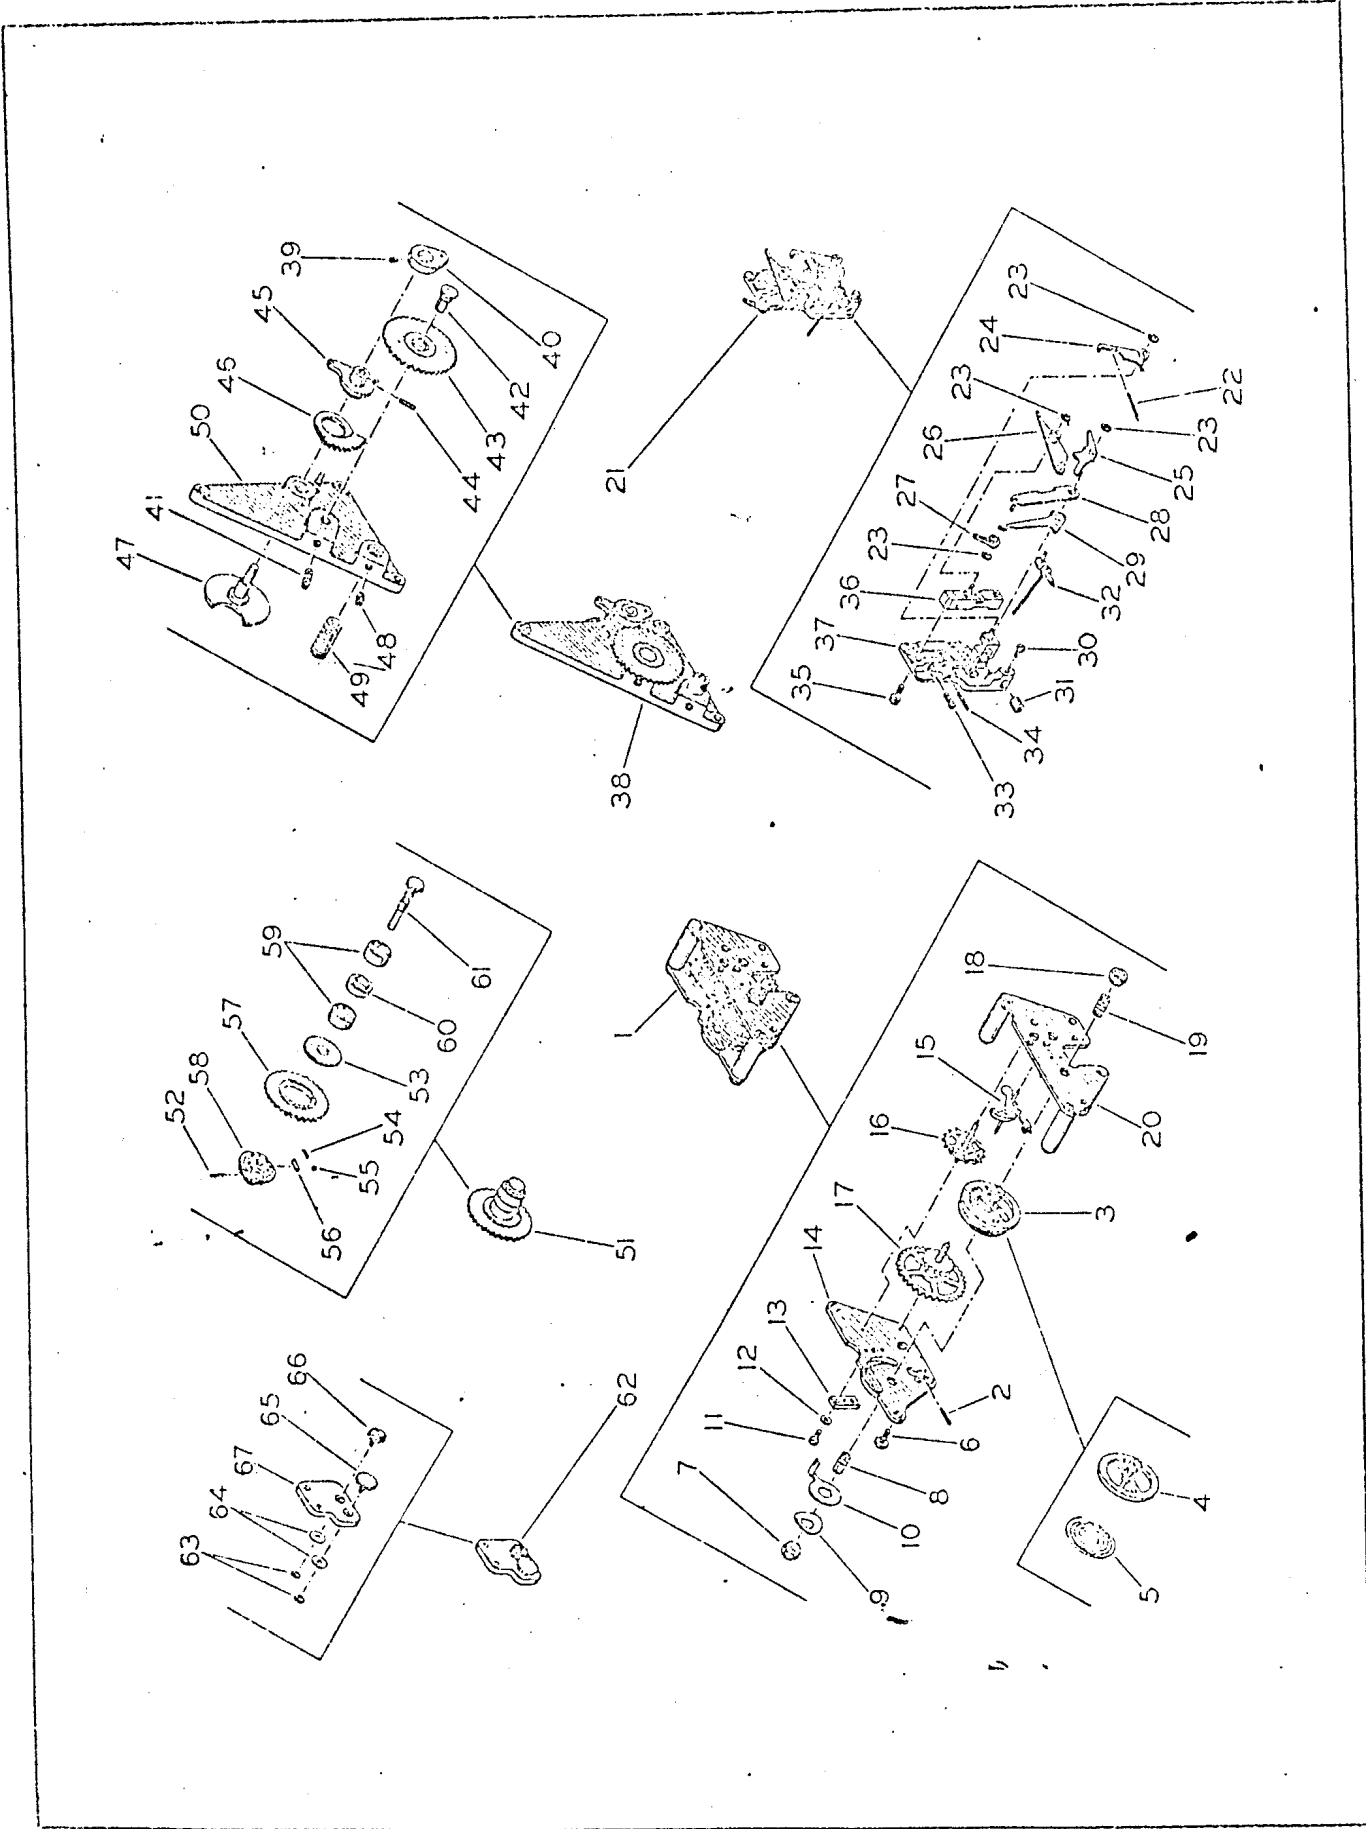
Clock Mechanism, Control Unit, Plate, Shaft and Clutch, Dial Plate and Gear Assemblies
